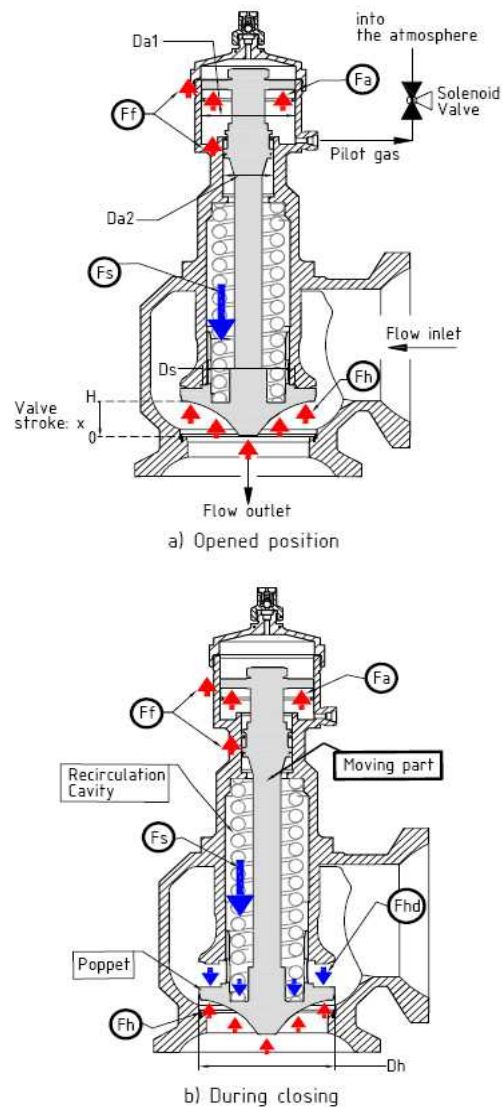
Forces on the valve moving part and principal dimensions of the main oxidizer shut-off valve
